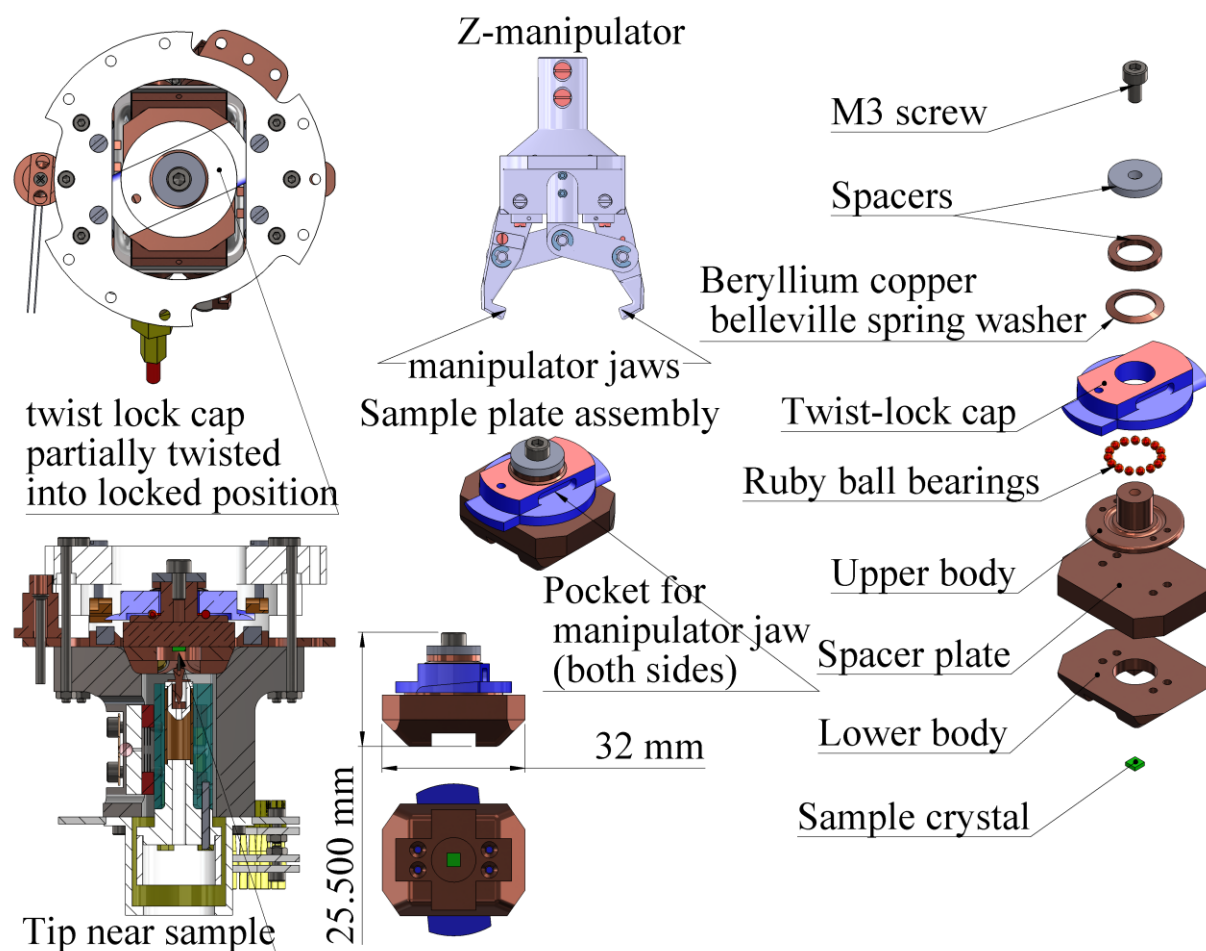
Schematic of sample plate design, transfer mechanism and scheme for locking the sample plate into the head. Pockets in the twist lock cap allow the sample plate to be held by the jaws of the Z-manipulator arm for sample loading and removal. To load a sample into the head, the sample is lowered downwards until the lower body of the sample plate is constrained by the sample alignment cavity in the main body of the STM head. The twist-lock cap can then be rotated relative to the remainder of the sample plate assembly. This causes the sloped “wings” of the twist lock cap to wedge themselves underneath the PEEK clamping blocks attached to the STM upper body, securely locking the sample plate in place. The jaws of the manipulator are then opened and the manipulator can be removed. To remove a sample from the STM head, the process is reversed. A beryllium copper spring washer pre-loads the twist-lock cap against a set of ruby ball bearings, which ensure smooth, low-friction rotation of the cap in the sticky cryogenic UHV environment. The small dragging friction between the spring washer and the top of the twist lock is enough to prevent unwanted rotations without hindering the intentional ones.
